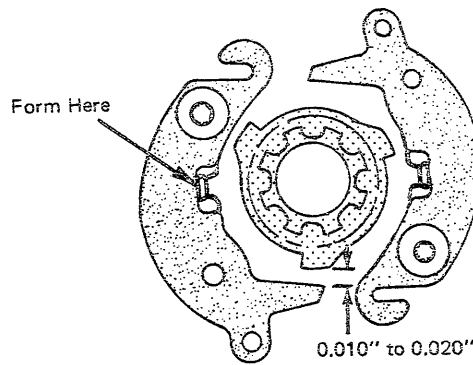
Motor Clutch Pulley (Level 1 Only)
